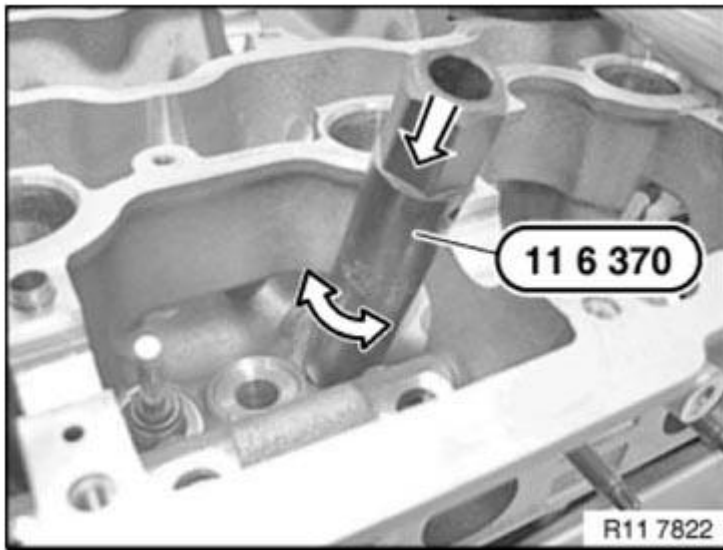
Pressing Special Tool 11 6 370 Onto Valve Stem Seal
